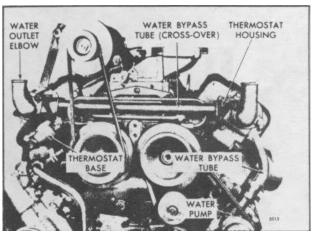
Thermostat Housings Mounted on a 6V Engine
